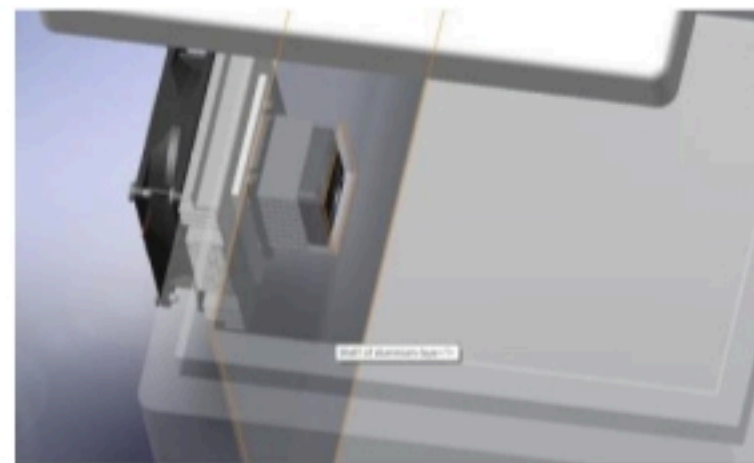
A look at peltier and heat sink Assembly
